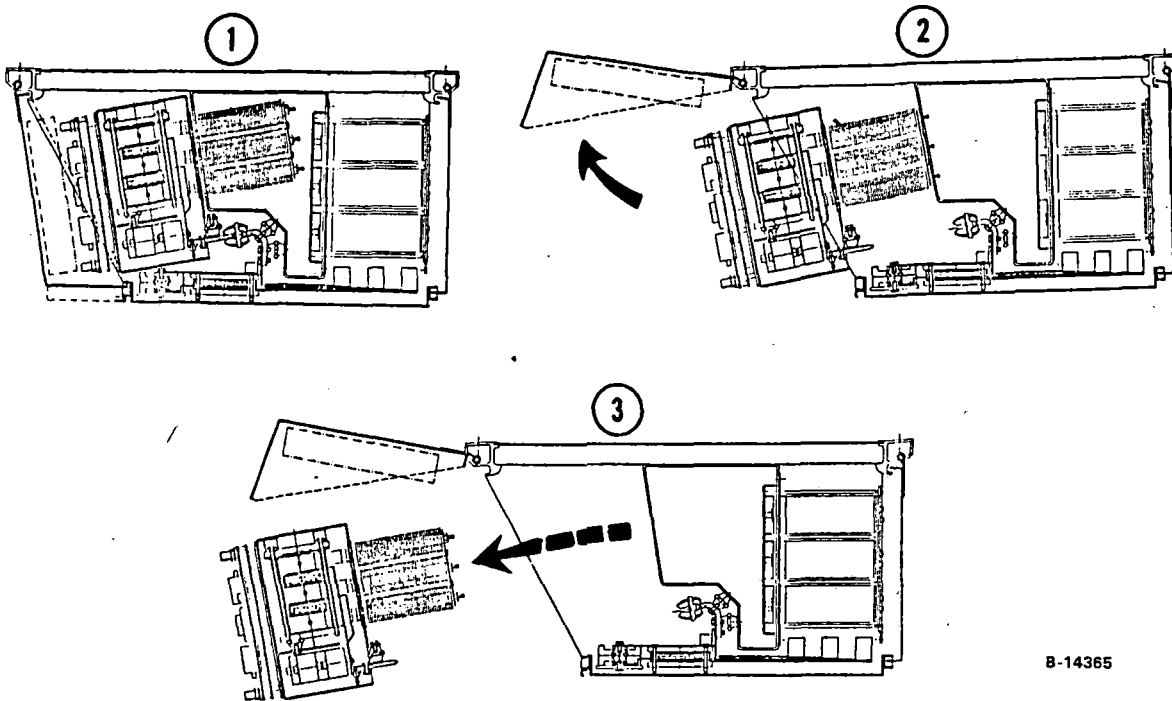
HEAT PIPE INVERTER PACKAGE
